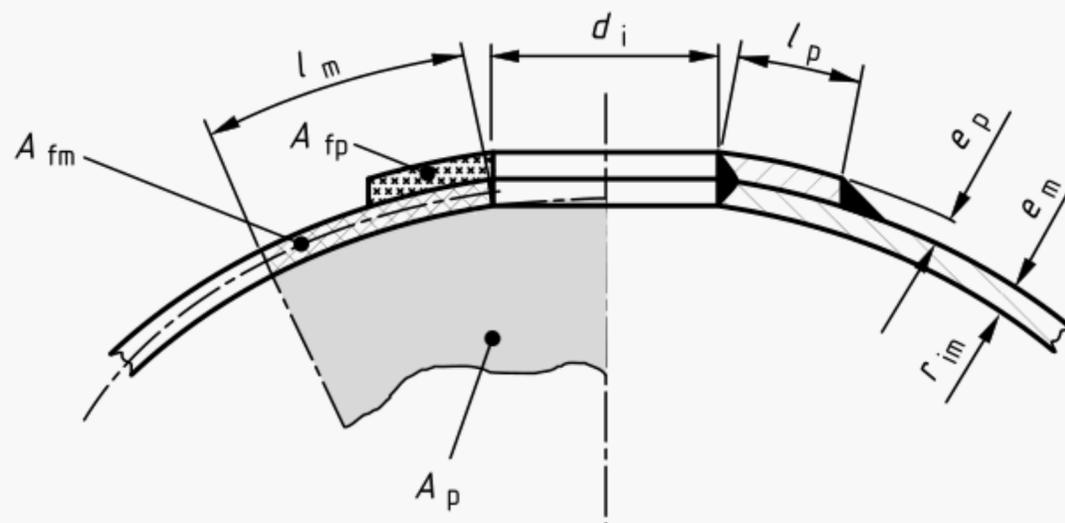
Design of openings – Cylindrical shells with isolated openings
